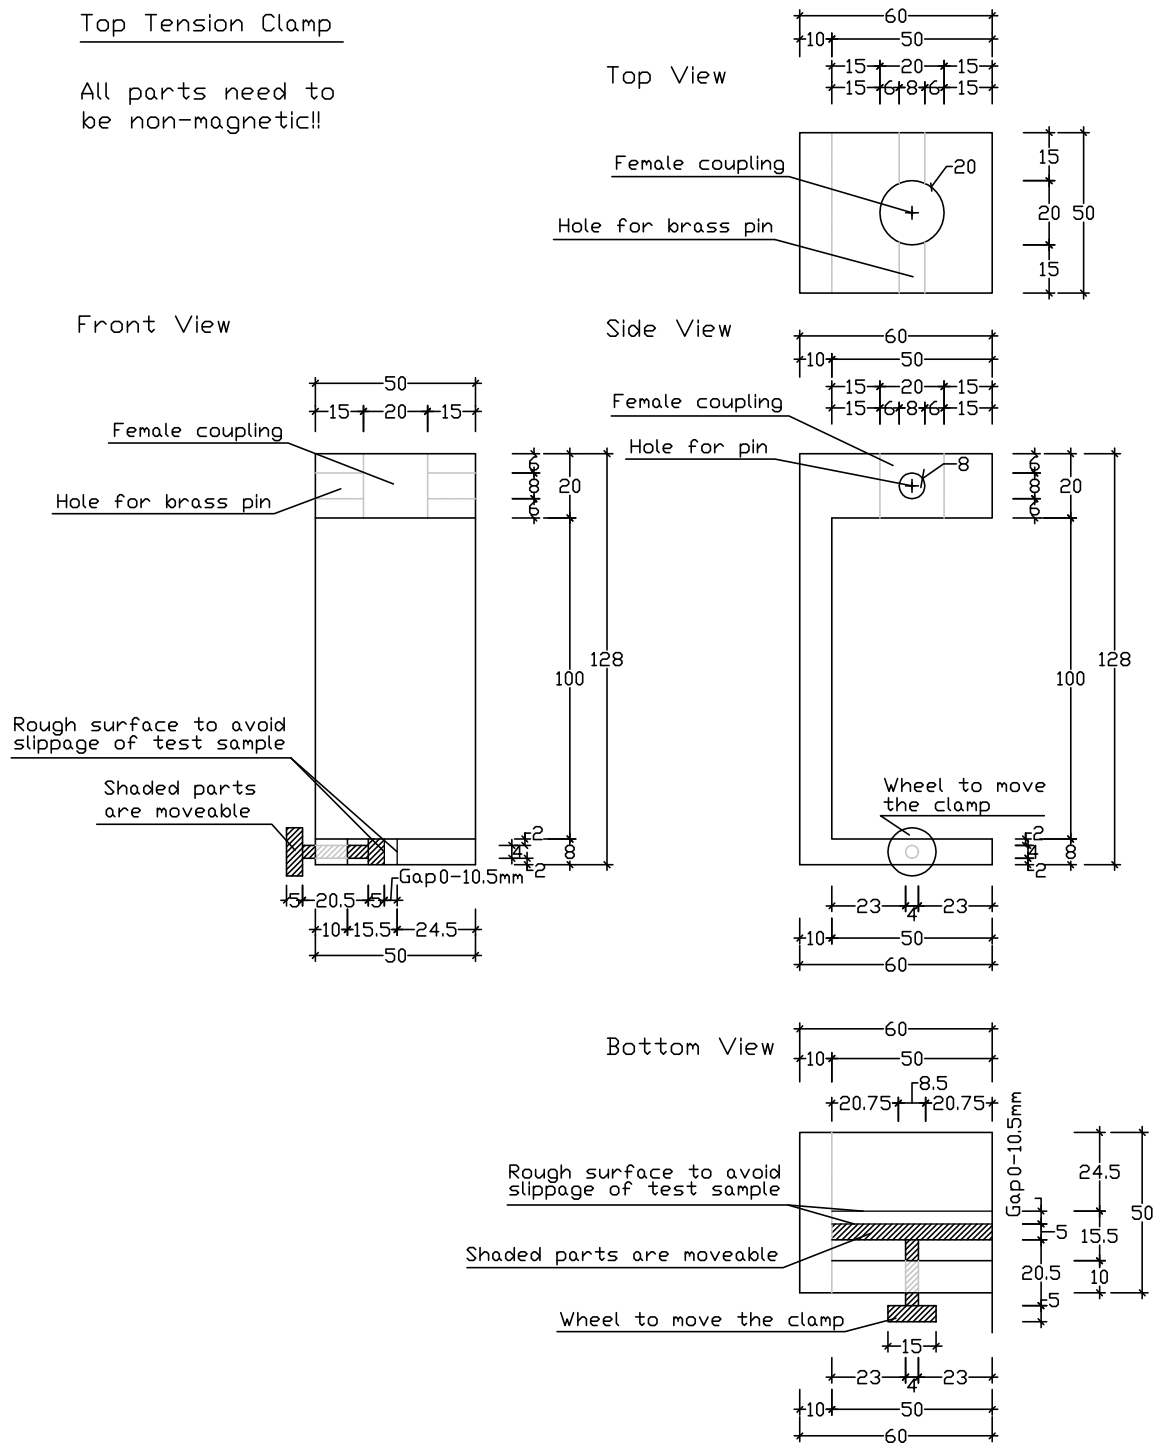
Technical drawing of the top part of the test rig structure used for tension and pure shear tests.
